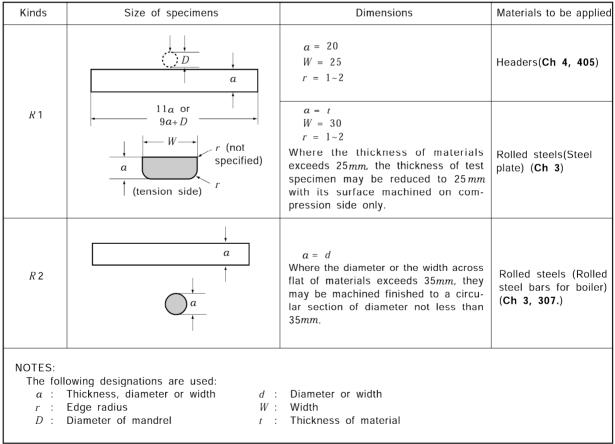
Size and Dimensions of Bend Test Specimens (Unit: mm)
